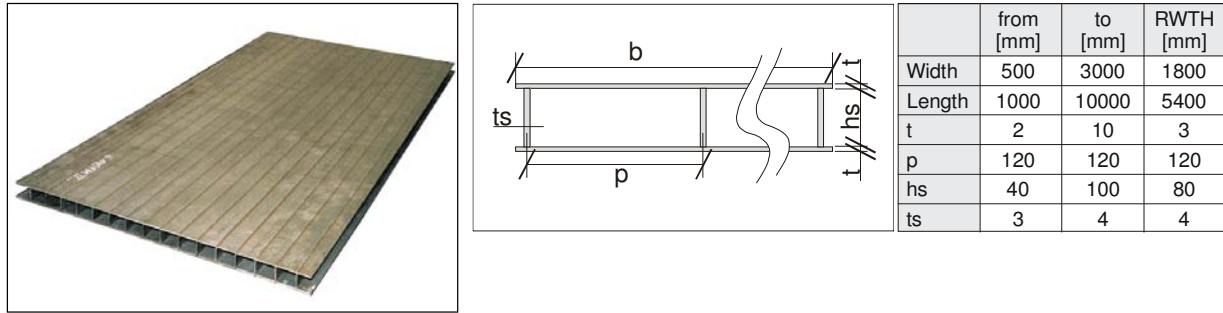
Laser welded steel sandwich panel with upper deck plate, vertical webs and lower deck plate (left), dimensions of laser-welded panels (right)
